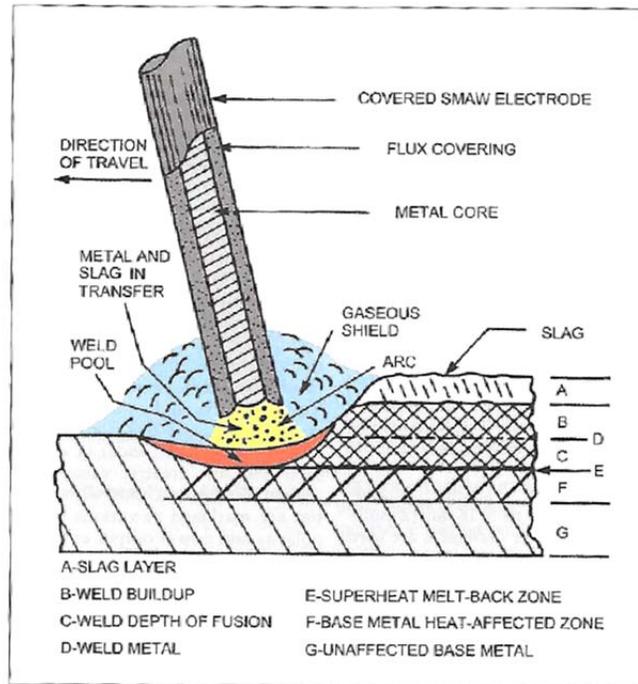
Schematic Representation of Shielded Metal Arc Welding.
